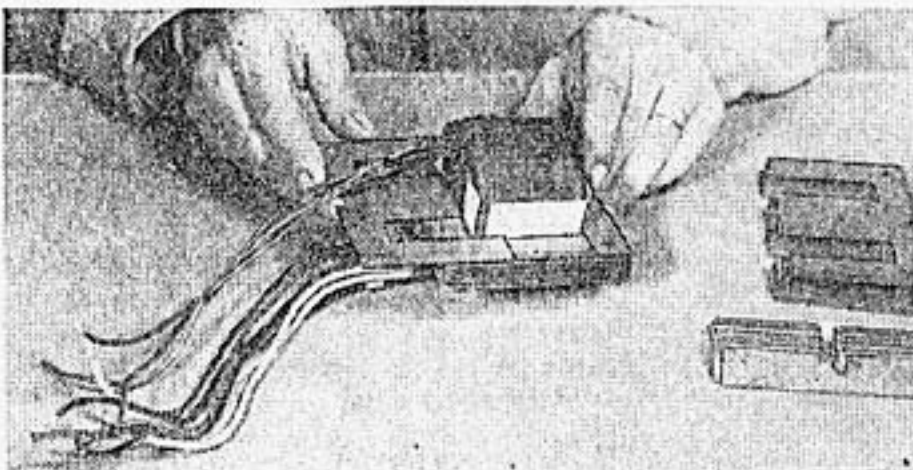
Core is being built up within the coil by alternating the positions of the E and the straight pieces. Pieces of insulation protect winding against grounding.
